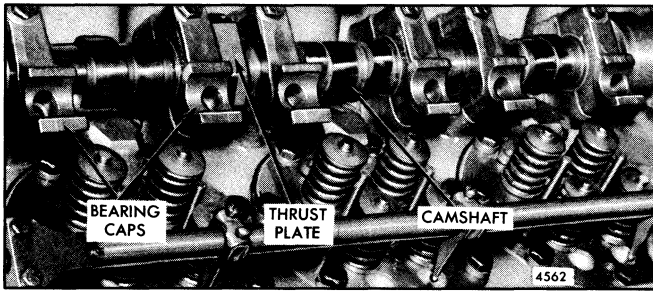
Camshaft Bearing Caps and Thrust Plate
